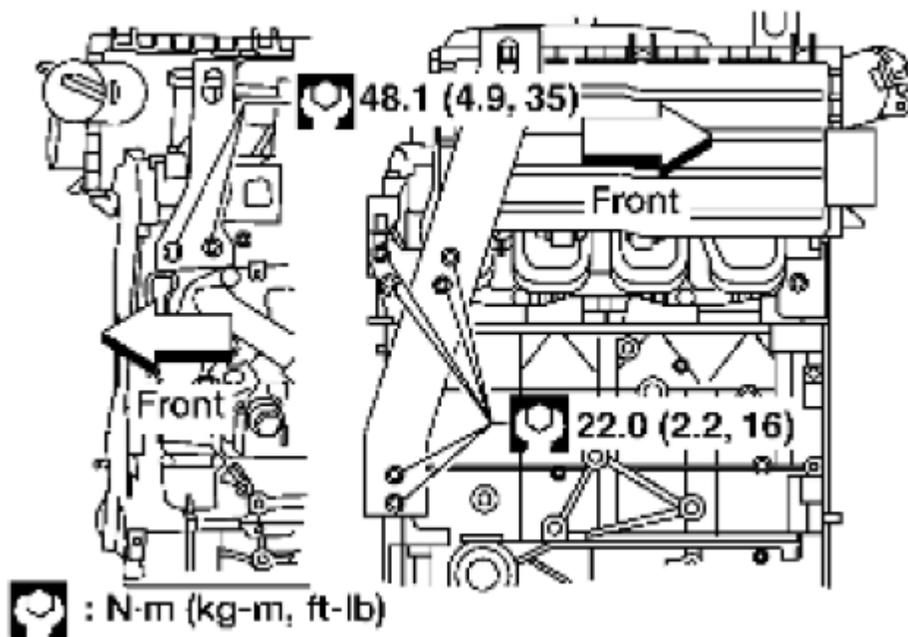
Identifying Front And Rear Engine Slingers Torques
